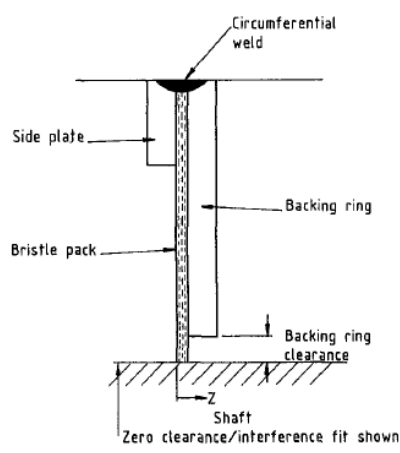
Schematic drawing of a brush seal taken from [6]
